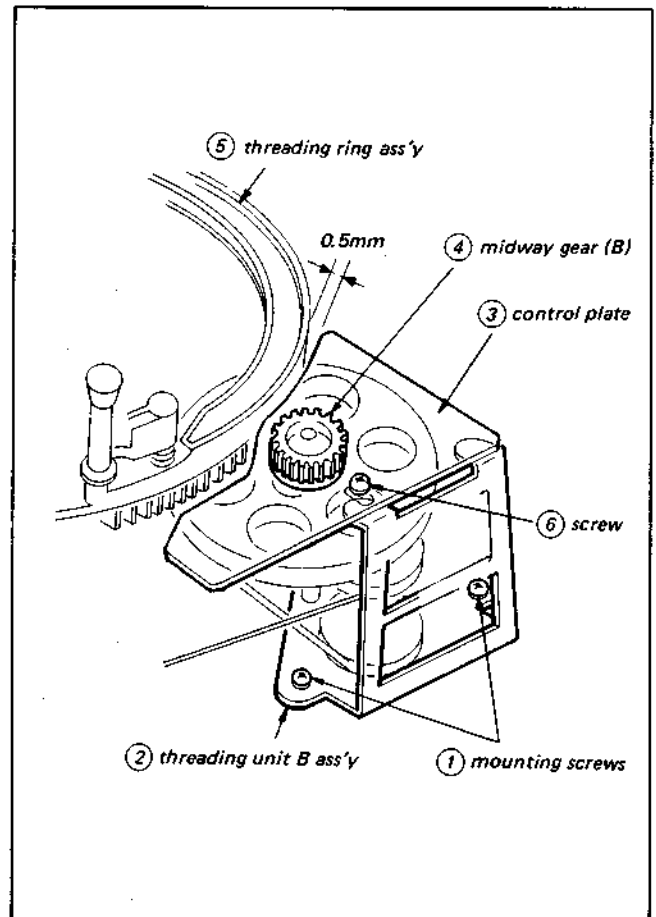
Position adjustment of threading unit B assembly and control plate
